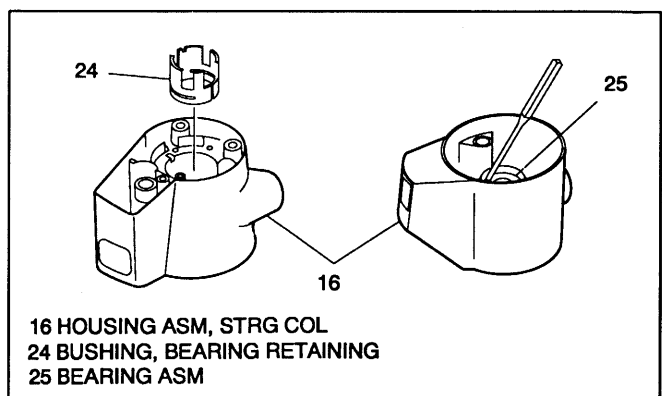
Installing Bearing Assembly and Bearing Retaining Bushing
